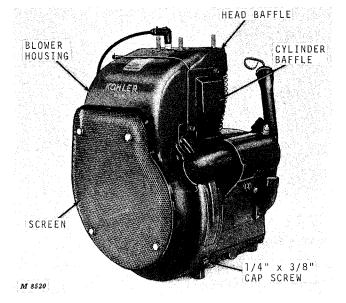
Installing Engine Shrouding (K241AS Engine)
